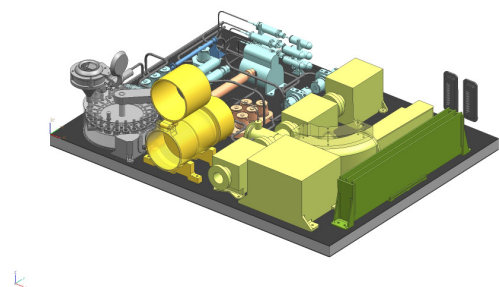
CAD model of the internal layout of L-VRAP. Subsystem details are listed opposite.
